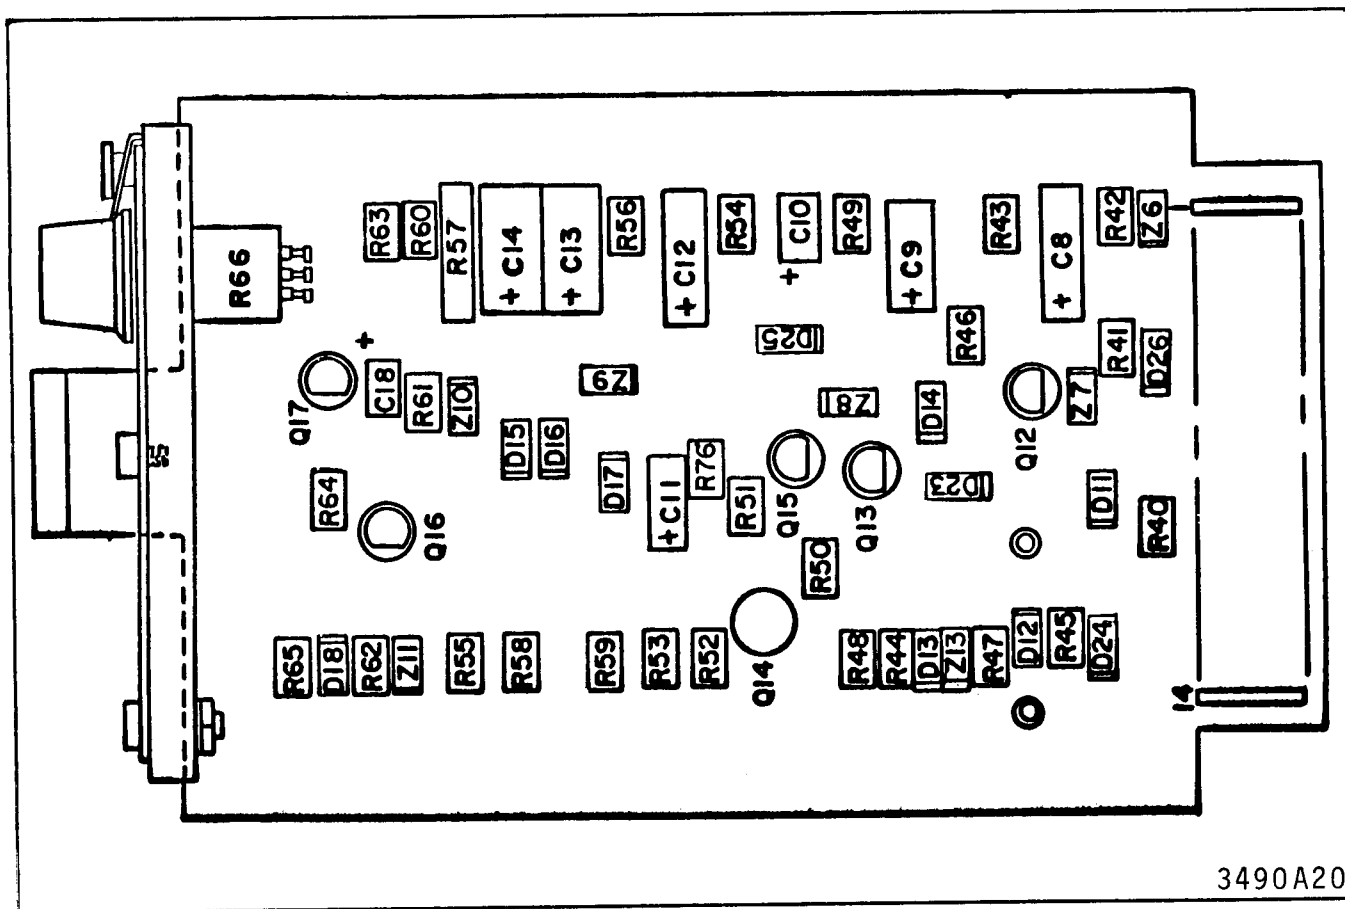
Component Location of Reclose Printed Circuit Board for Type SGRU-52 Relay.
